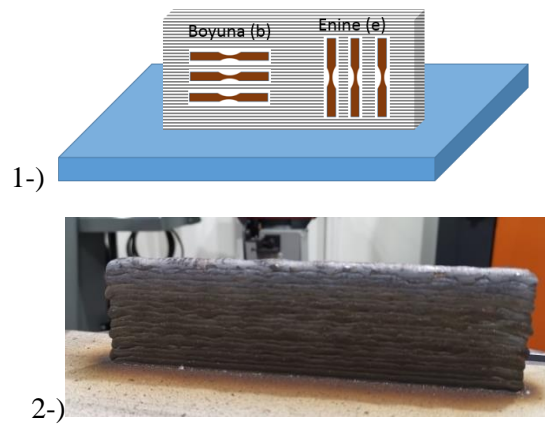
1-) Horizontal and vertical test specimens taken from thin wall. 2-) Thin wall manufactured via WAAM.
